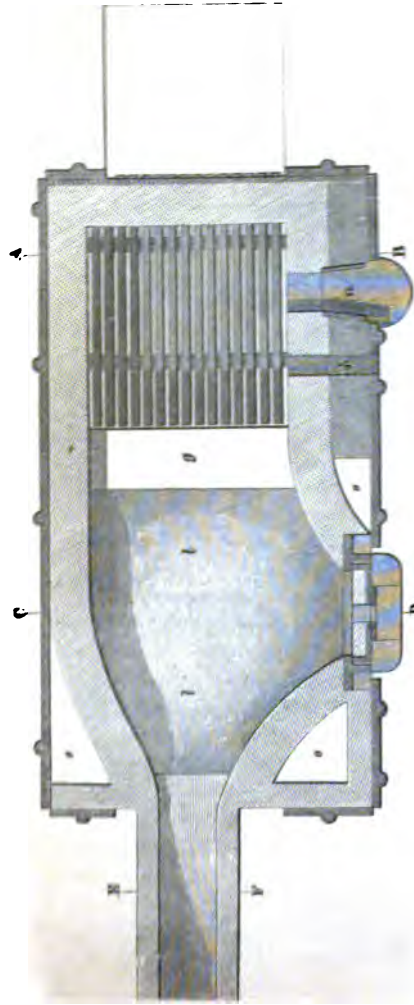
Horizontal section above the fire-bridge, showing the plan of the bed.
